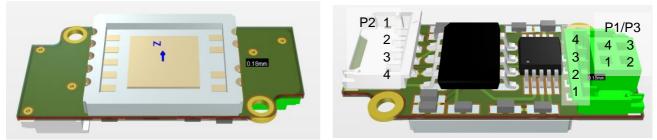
FSS Layout, top with sensor shown left, and bottom shown right.
